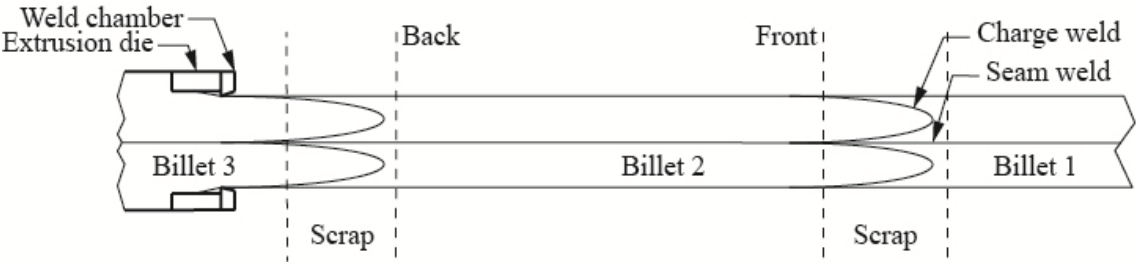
Successive extrusion showing the seam weld and the charge weld [15]
